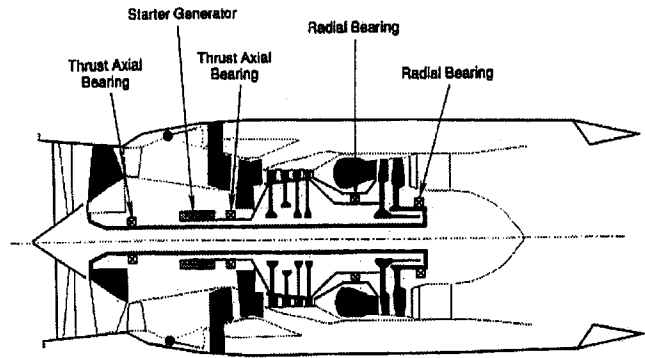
Advanced four-bearing turbofan engine with magnetic bearings and integral starter/generator
